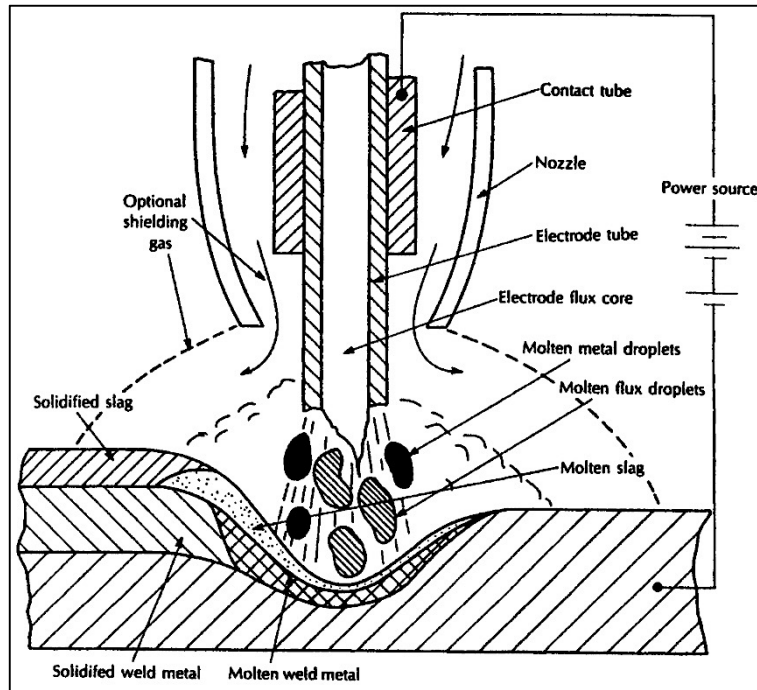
Flux-cored arc welding (FCAW) process. Even without using the optional shielding gas, the molten flux droplets separate the weld pool from ambient, producing a good protection. The use of optional shielding gas produces a very strong protection of the weld pool, resulting in a good weld metal quality. Taken from Messler Jr (1999, p.67 [26])
